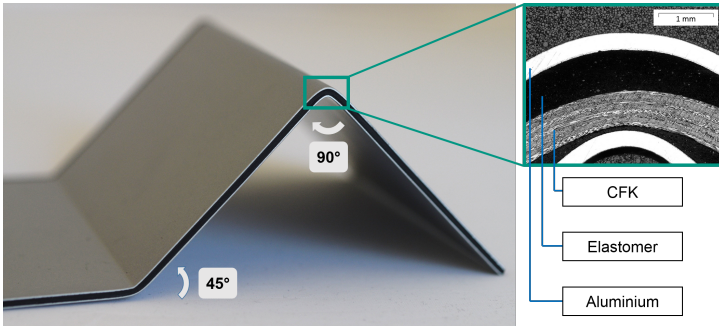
Formed FMEL with aluminum face sheets [128]
